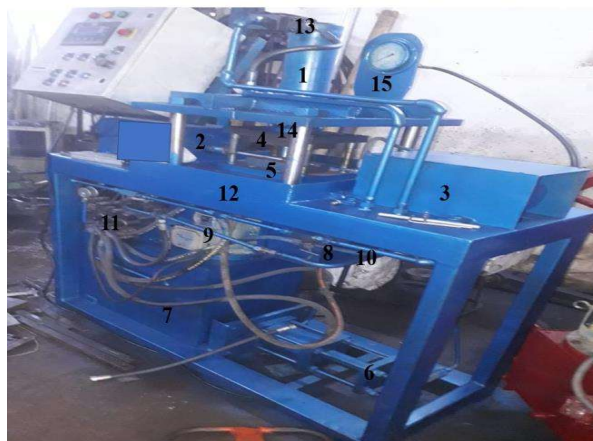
Fabricated tube hydroforming machine assembly set-up
